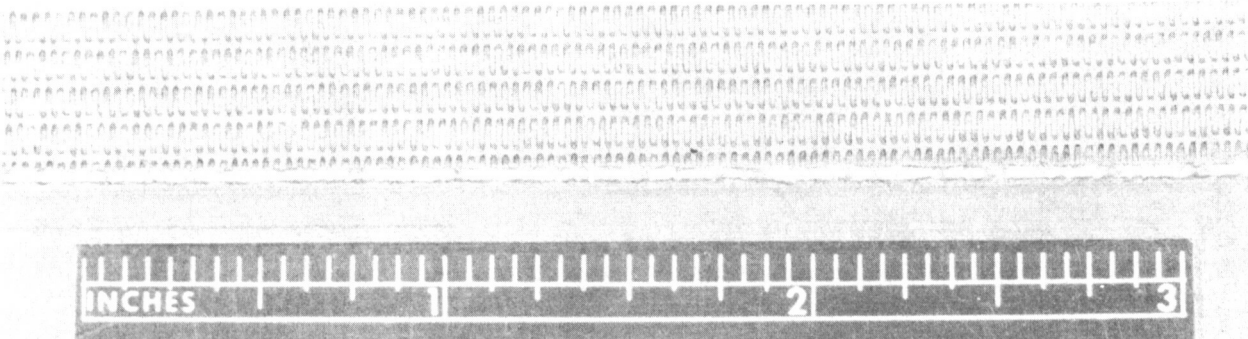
Butt Weld (Electron Beam) Warp to Sheet 1.6X
